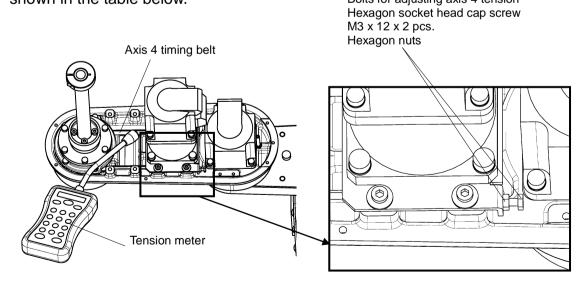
Adjusting axis 4 tension (KHL-300, KHL-400)
